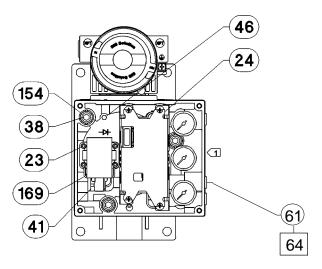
FIELDVUE DVC6020 SIS Digital Valve Controller Assembly
